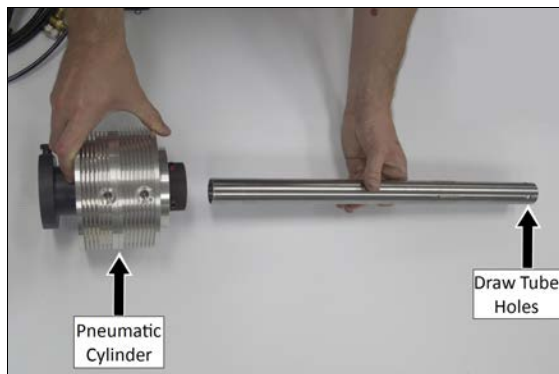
Example of a draw tube aligned with a pneumatic cylinder.
